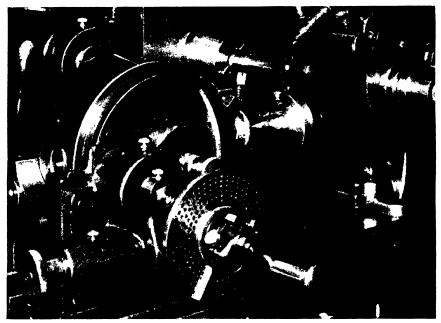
CUTTING A SPUR GEAR ON A MILLING MACHINE WITH INDEX CENTRES A form cutter is used and the work is indexed the required amount by means of the spiral index head. The work is held on a mandrel and mounted between centres. (Buck & Hickman, Ltd.)
